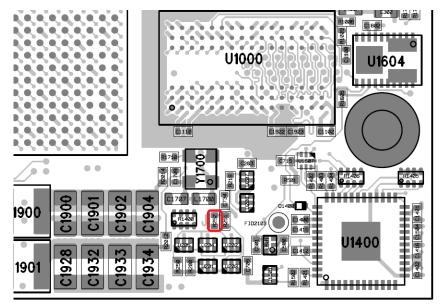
JTAG Boot Mode Resistor - Assembly Drawing Top View (lower right part)
